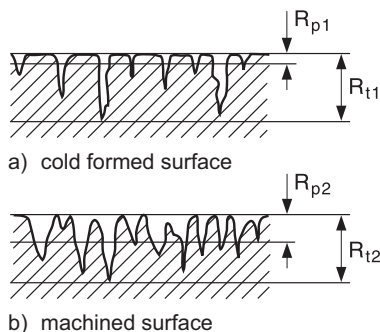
Surfaces produced by roller burnishing (a) and by normal machining (b)
